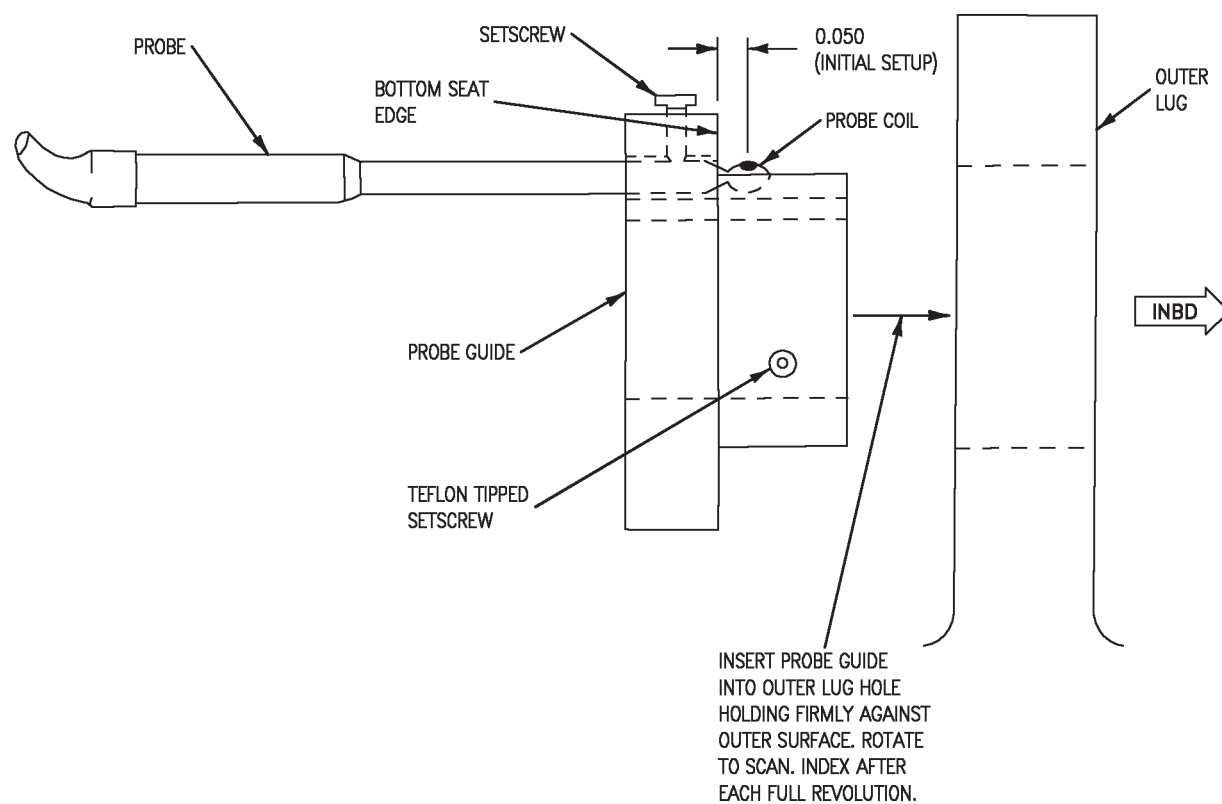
Eddy Current Probe and Probe Guide Adjustment, Setup, and Inspection
